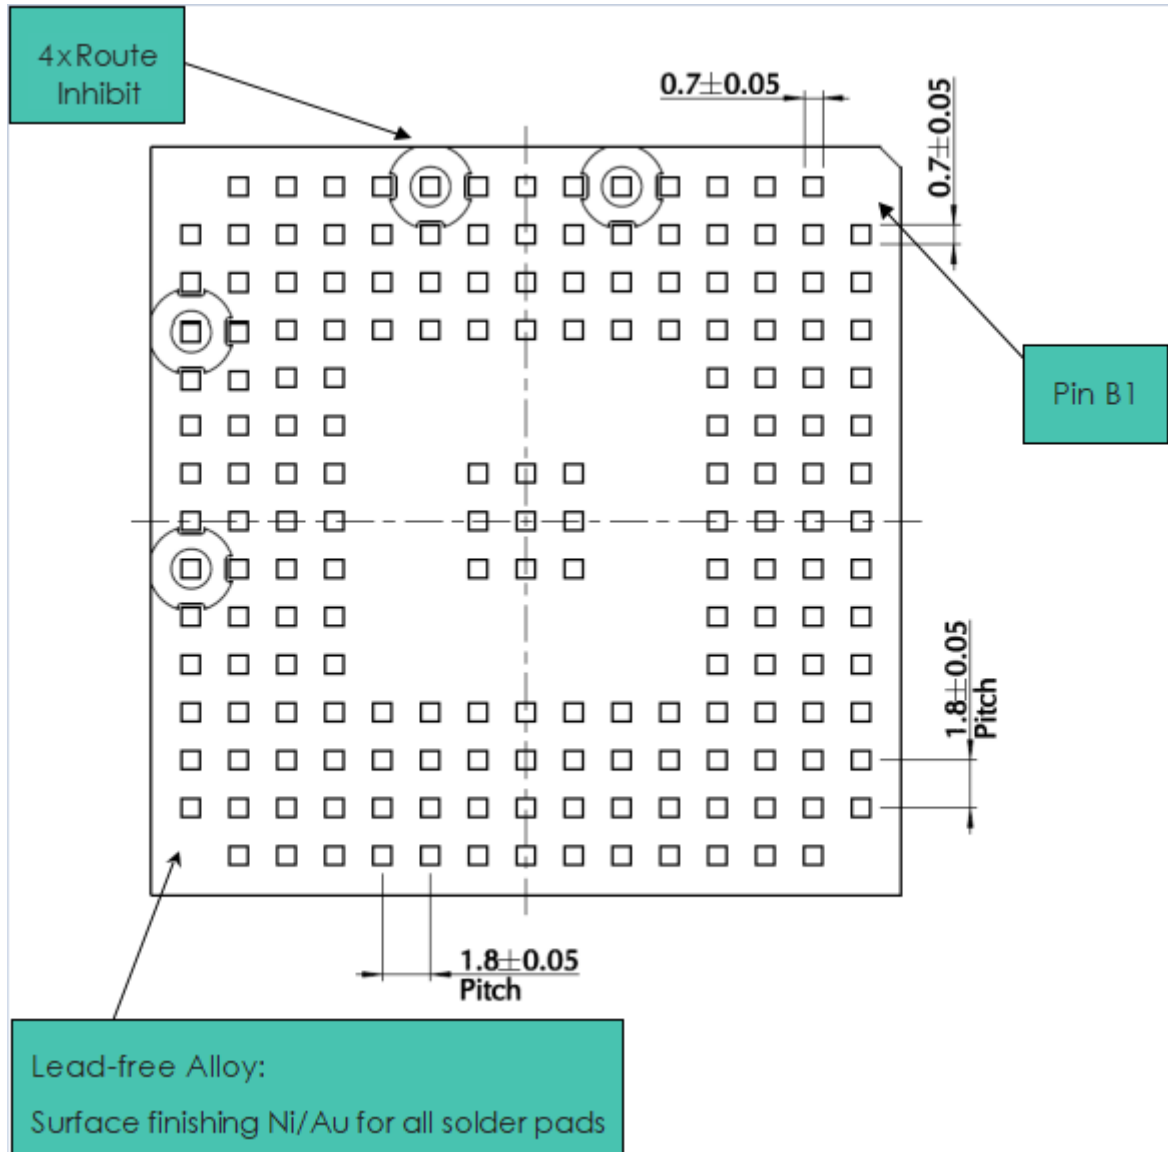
LE910R1 Mechanical Dimensions (Bottom View)
